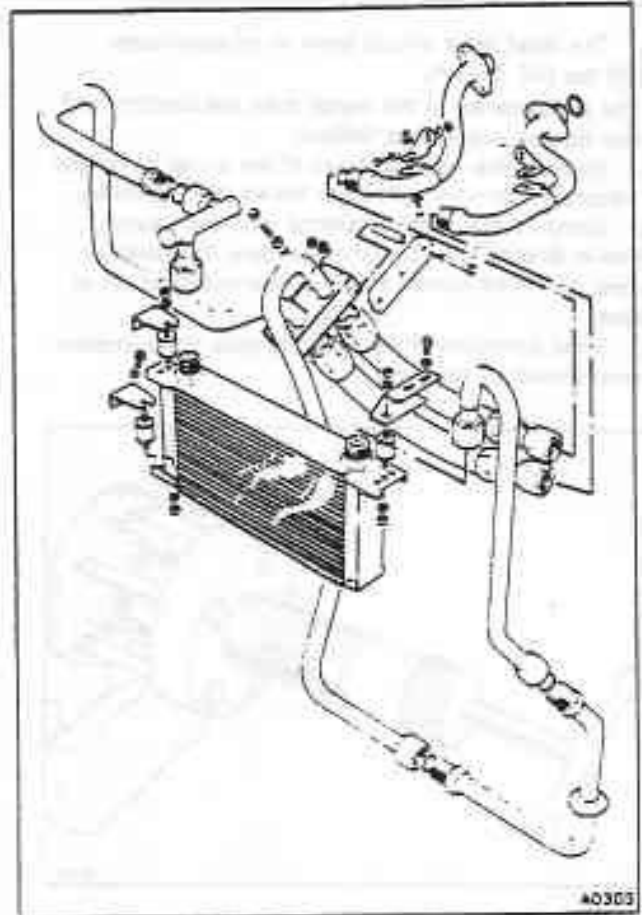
Engine oil cooler and associated pipes (Turbocharged engines)
